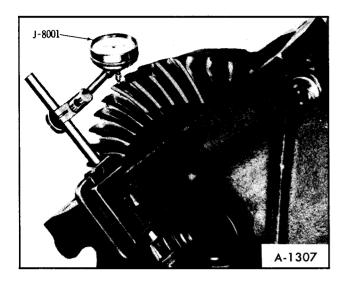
Checking Ring Gear To Pinion Gear Backlash
